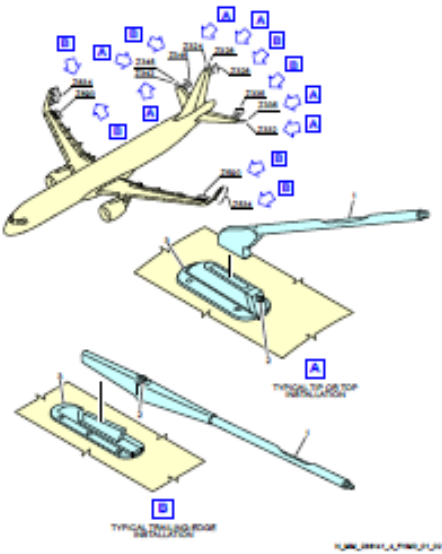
H (SHEET 1) - Static Discharger - Location and Detail
